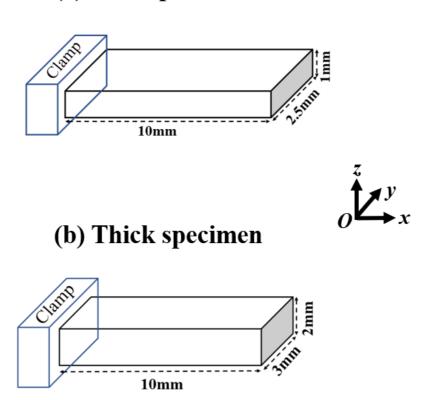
Schematic of two types of specimens: (a) thin specimen; (b) thick specimen.
